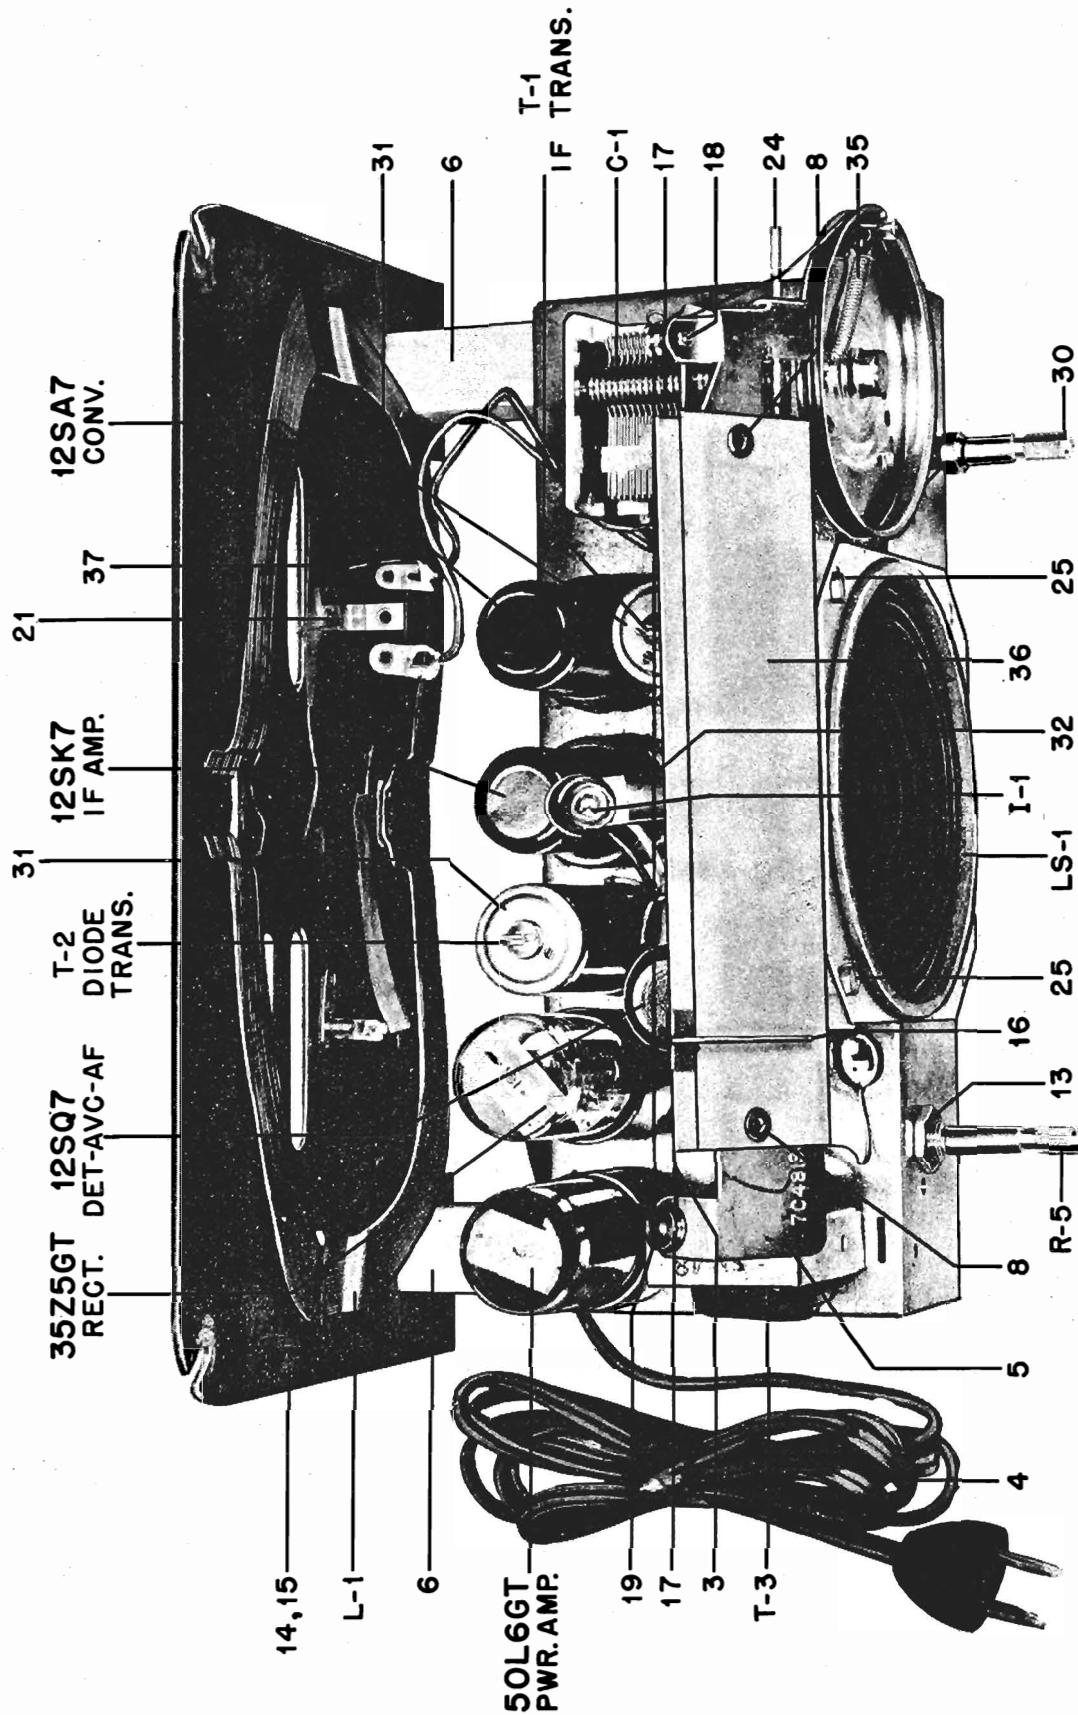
CHASSIS HS-125 PARTS LOCATION - TOP VIEW
